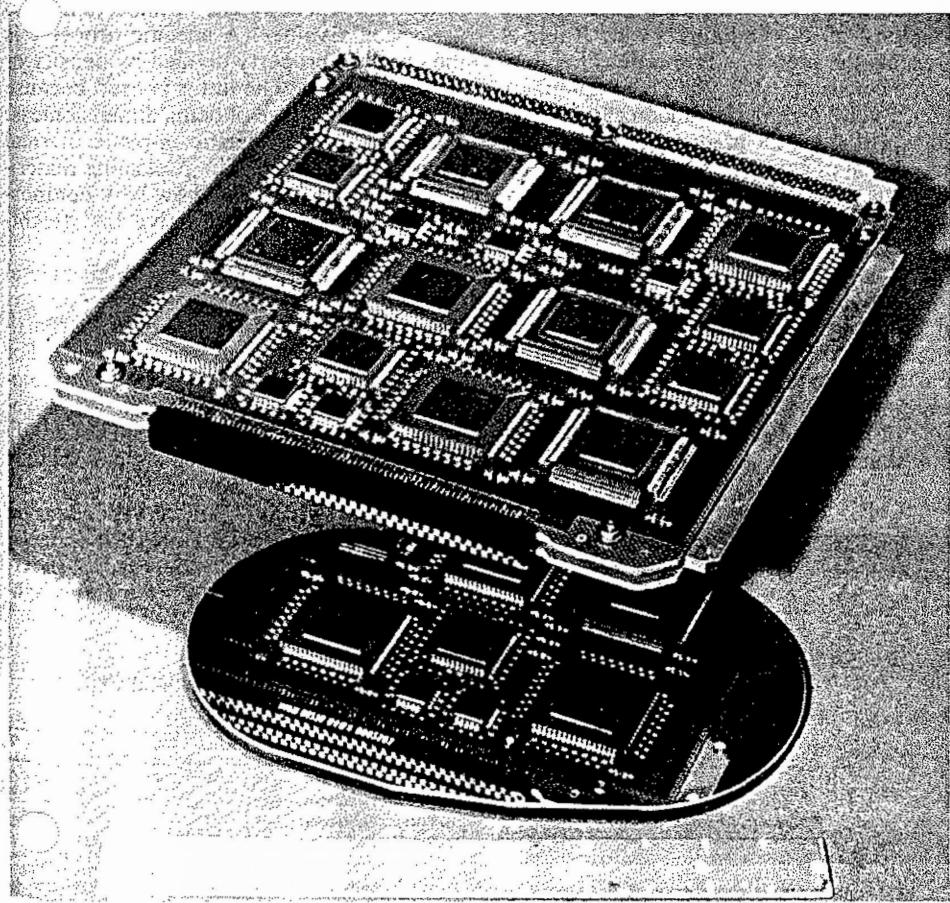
Printed wiring board assembly consisting of two PWBs bonded to a central heat sink
